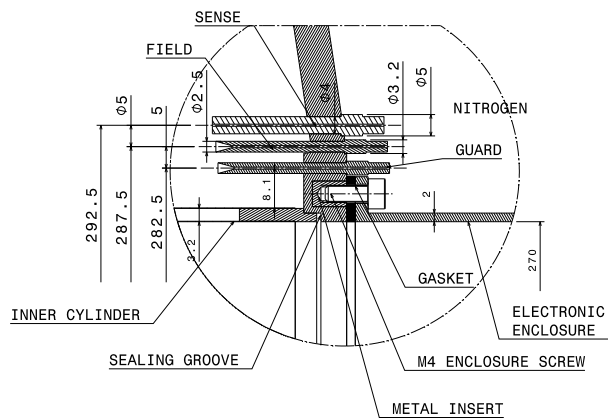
Coupling of the DCH inner cylinder to the endplate.
